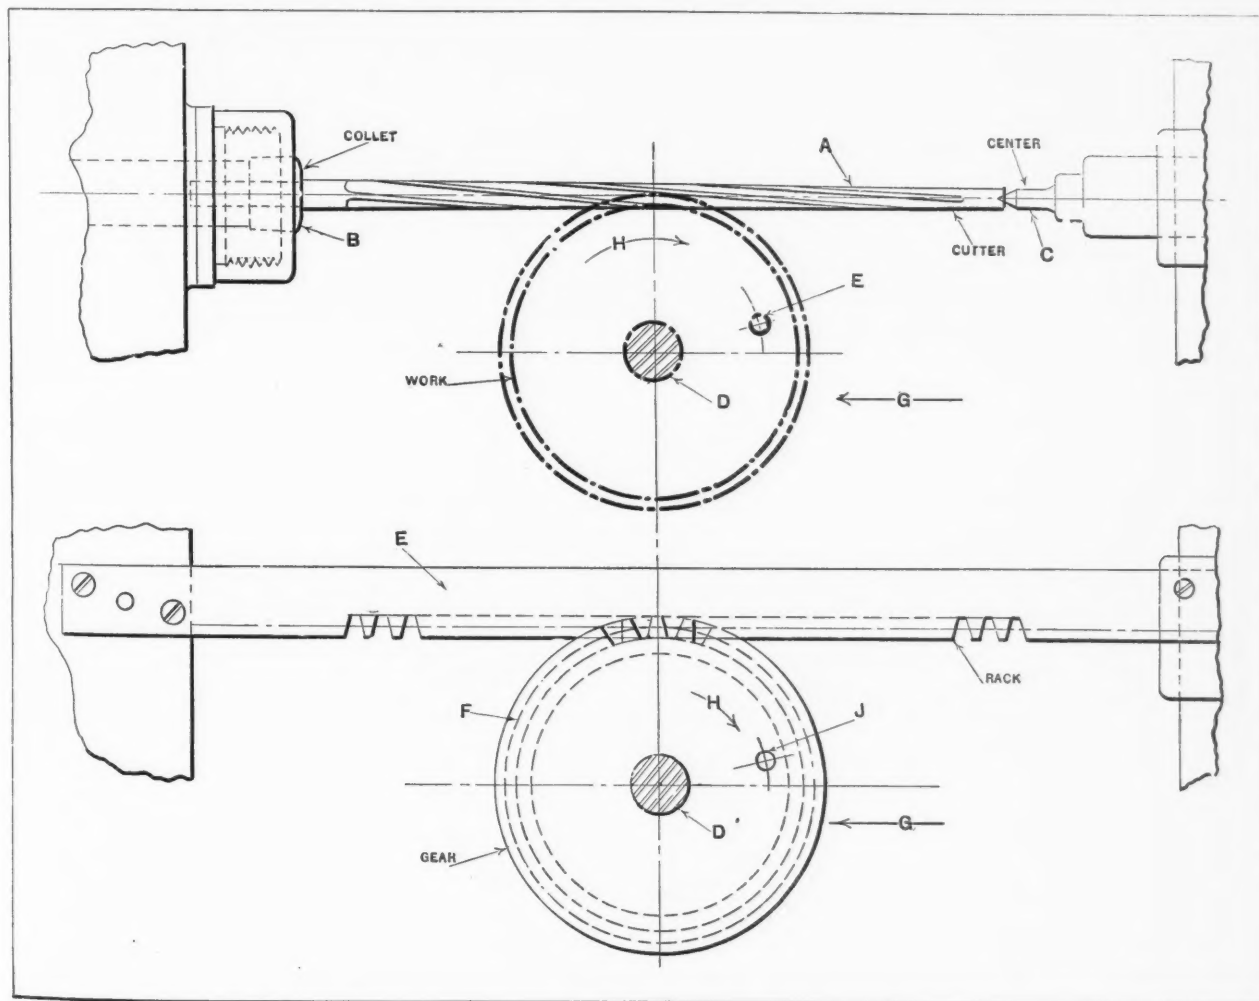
End View of Set-up for Cutting Tapered Grooves in Roll
